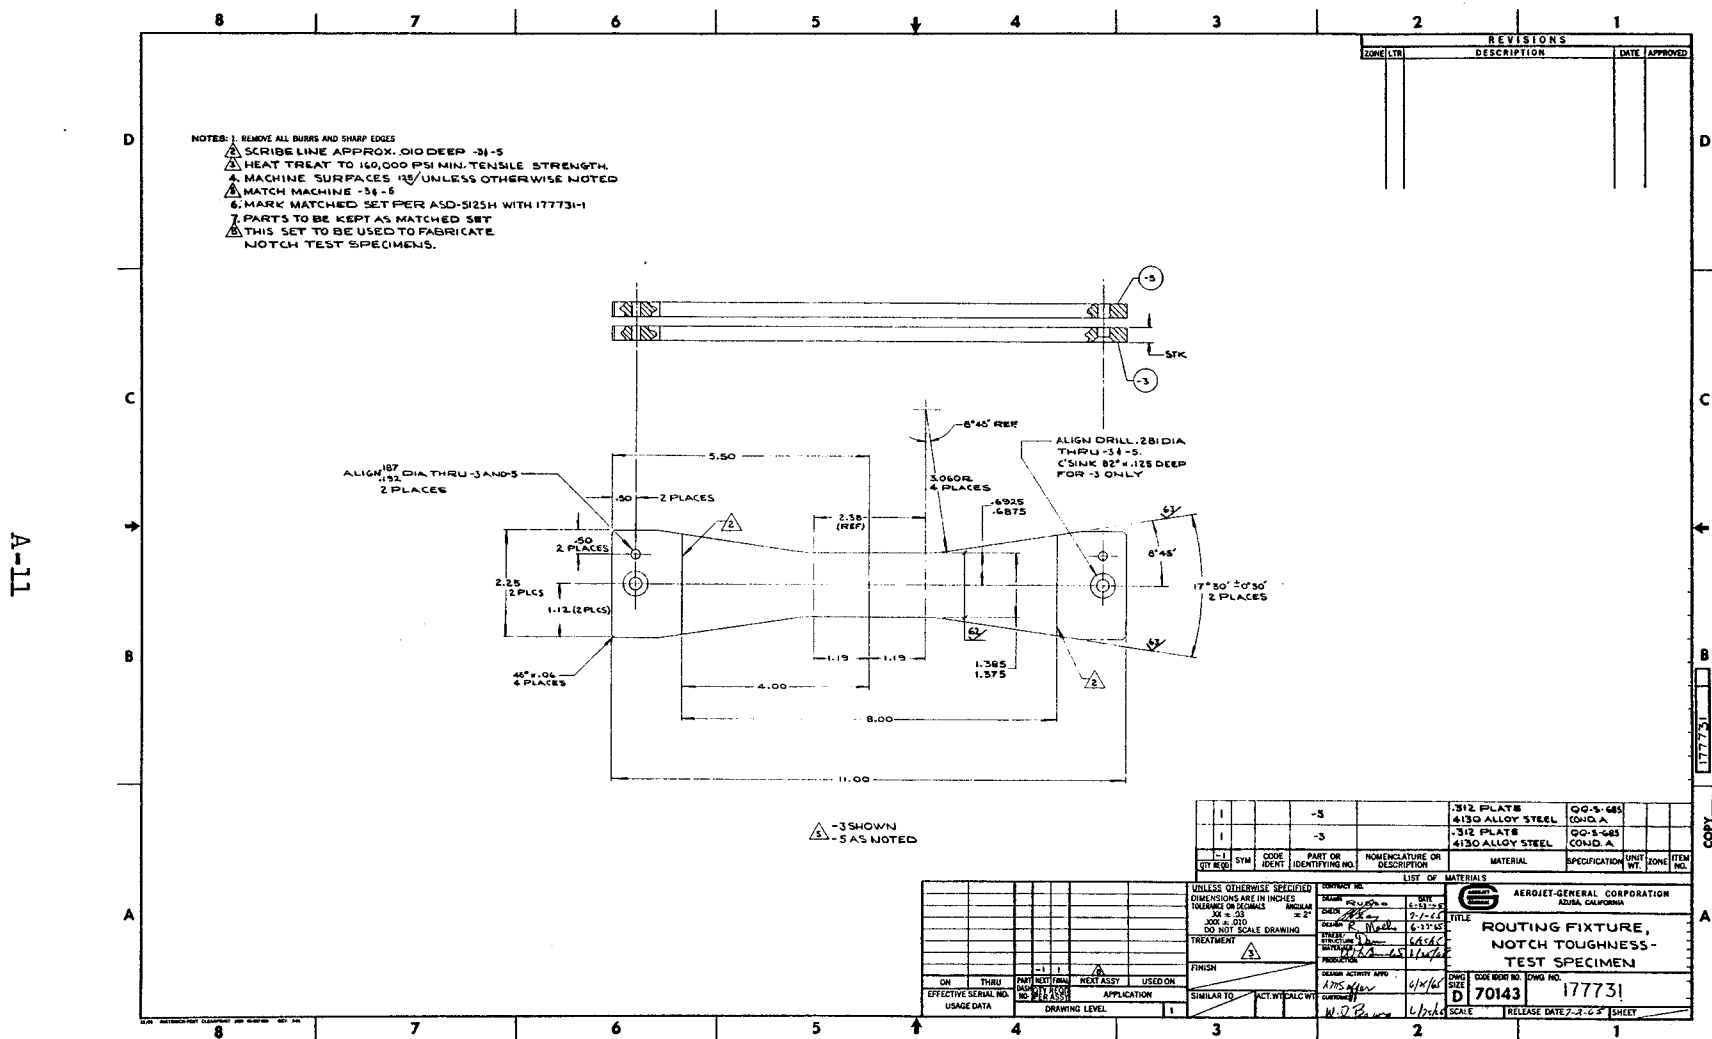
Routing Fixture, Notch-Toughness Test Specimen
